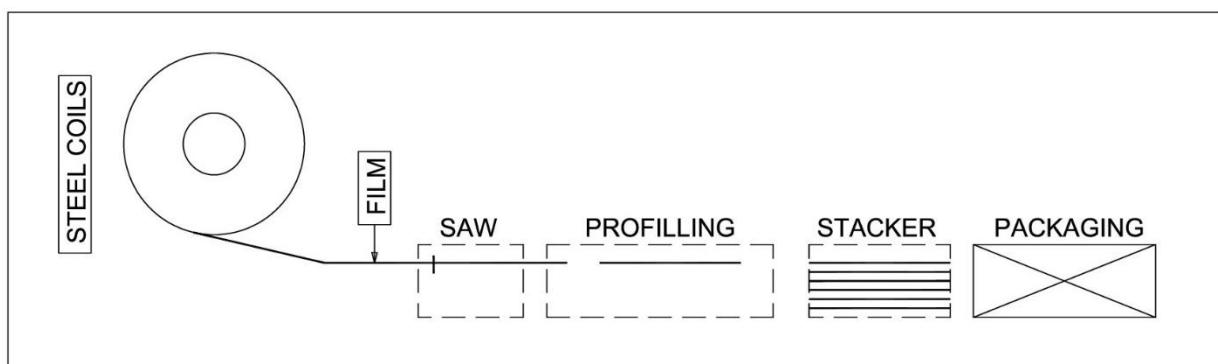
A scheme of manufacturing of the corrugated steel profile sheets for roofing, ceiling, cladding and flooring by ArcelorMittal Construcao Portugal SA.
